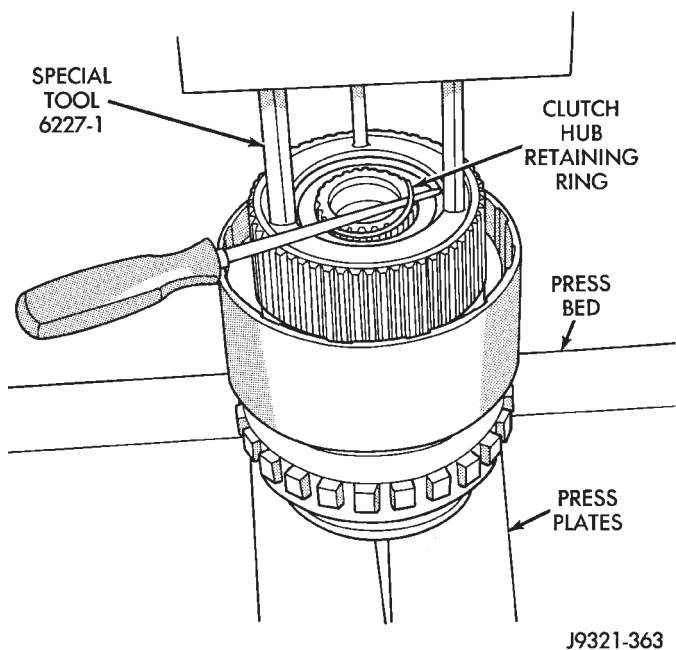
Direct Clutch Hub Retaining Ring Removal
